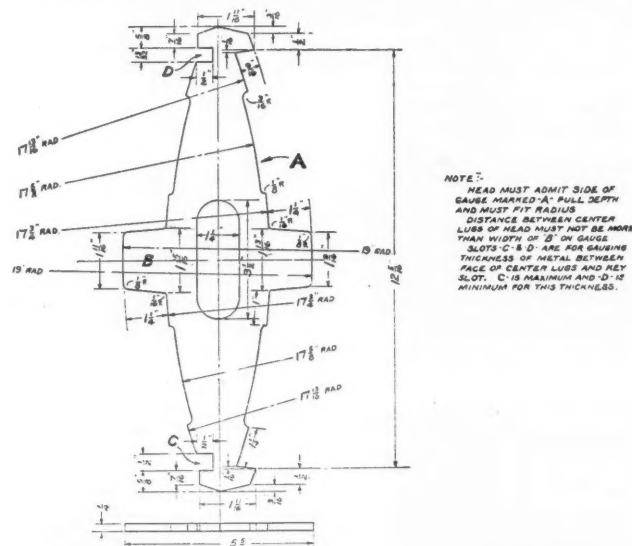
Recommended M. C. B. Standard Brake Head Gauge.
